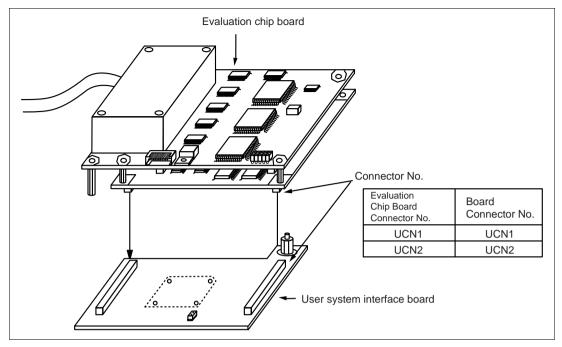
Connecting User System Interface Board to Evaluation Chip Board
